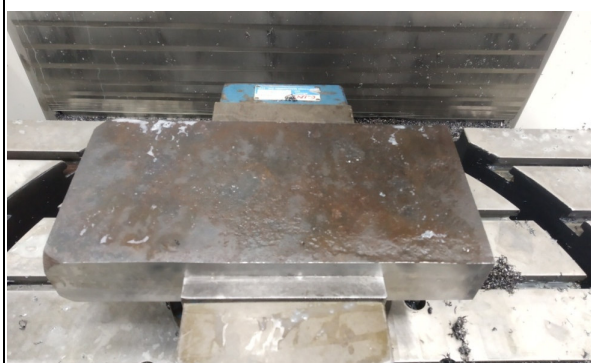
Peripheral milling of the workpiece on 5-axis Milling machine
